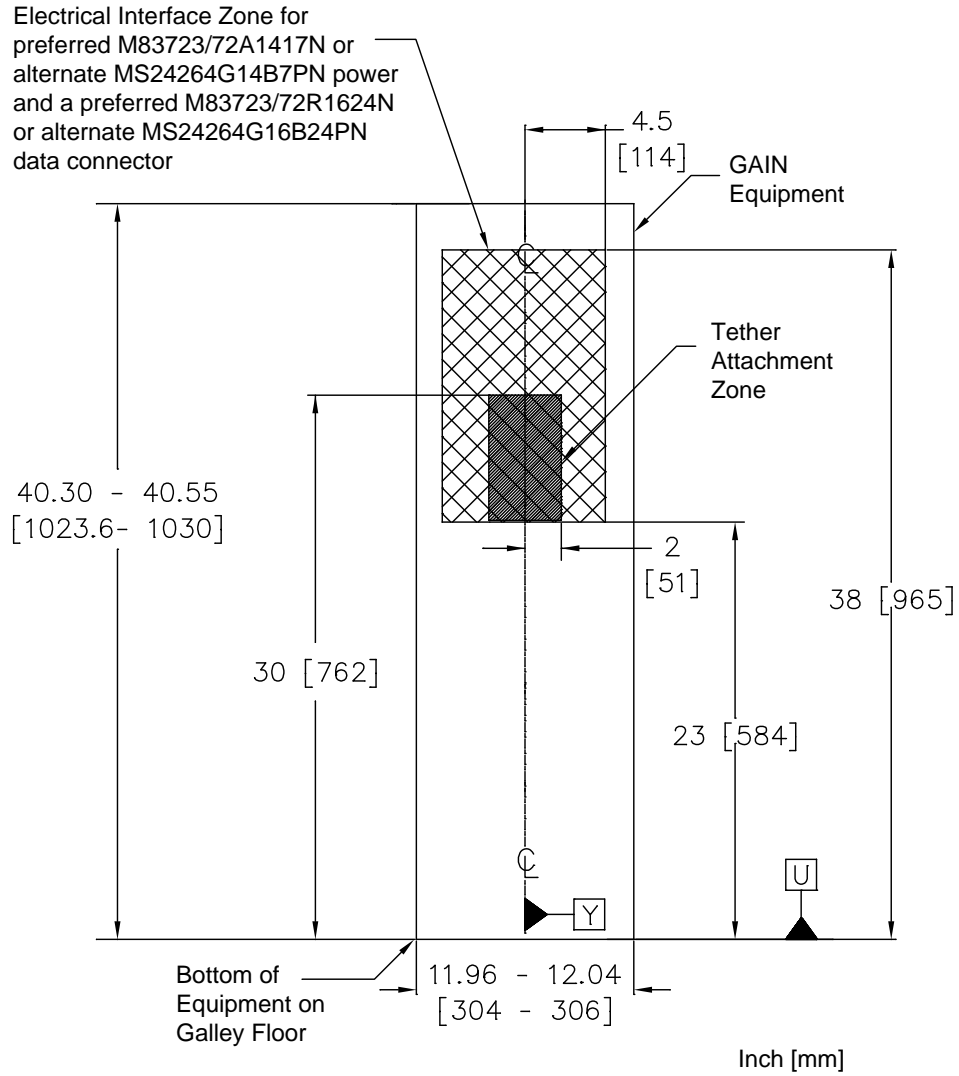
C – GAIN Size 3 Equipment Standard Dimensions Drawing – Rear View
